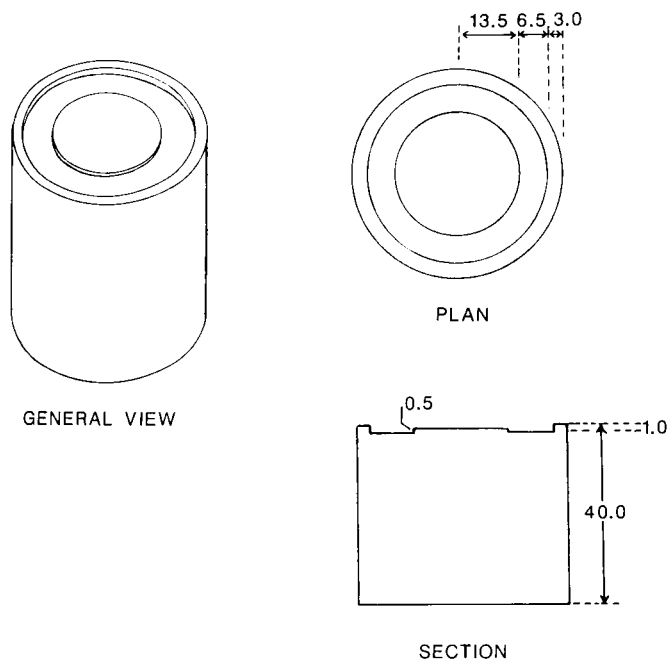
Tool for the uniform pressing of samples. Tool is manufactured from aluminium. All dimensions shown are in mm, and are approximate.
